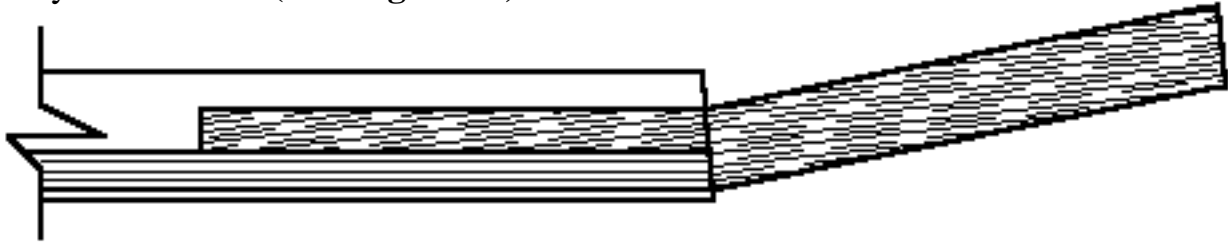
Section view of the hardwood and plywood assembly in the wing center section
